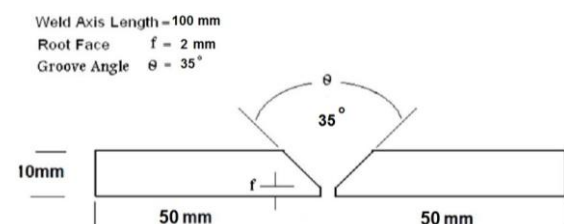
Schematic illustration of of sample preparation with BS EN ISO 9692 standard and arrangement of welding specimens.
